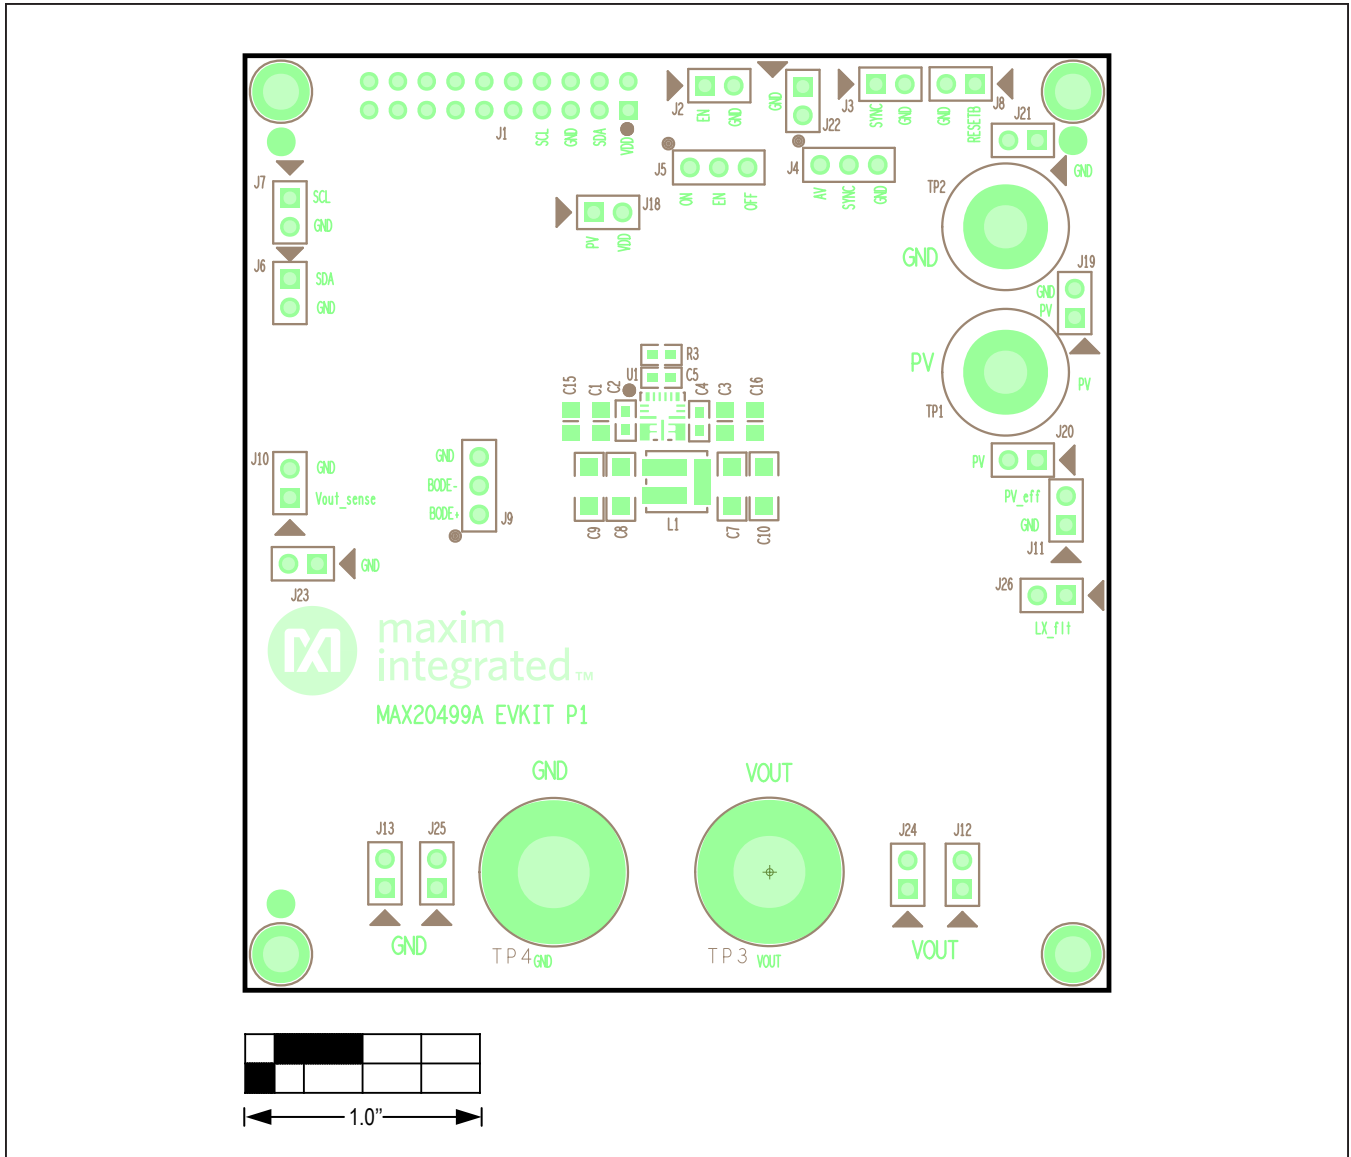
MAX20499A EV Kit Component Placement Guide—Top Assembly Drawing
